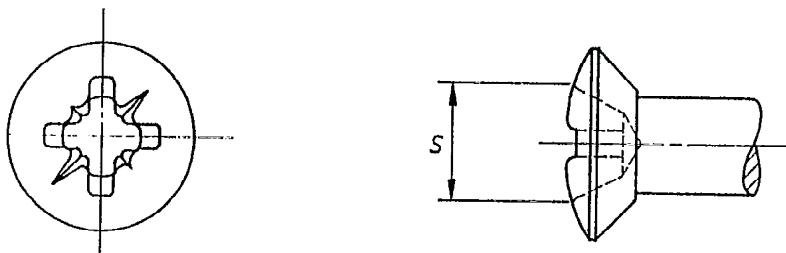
Recessed truncated raised countersunk head machine screws: enlarged views of recess type V
